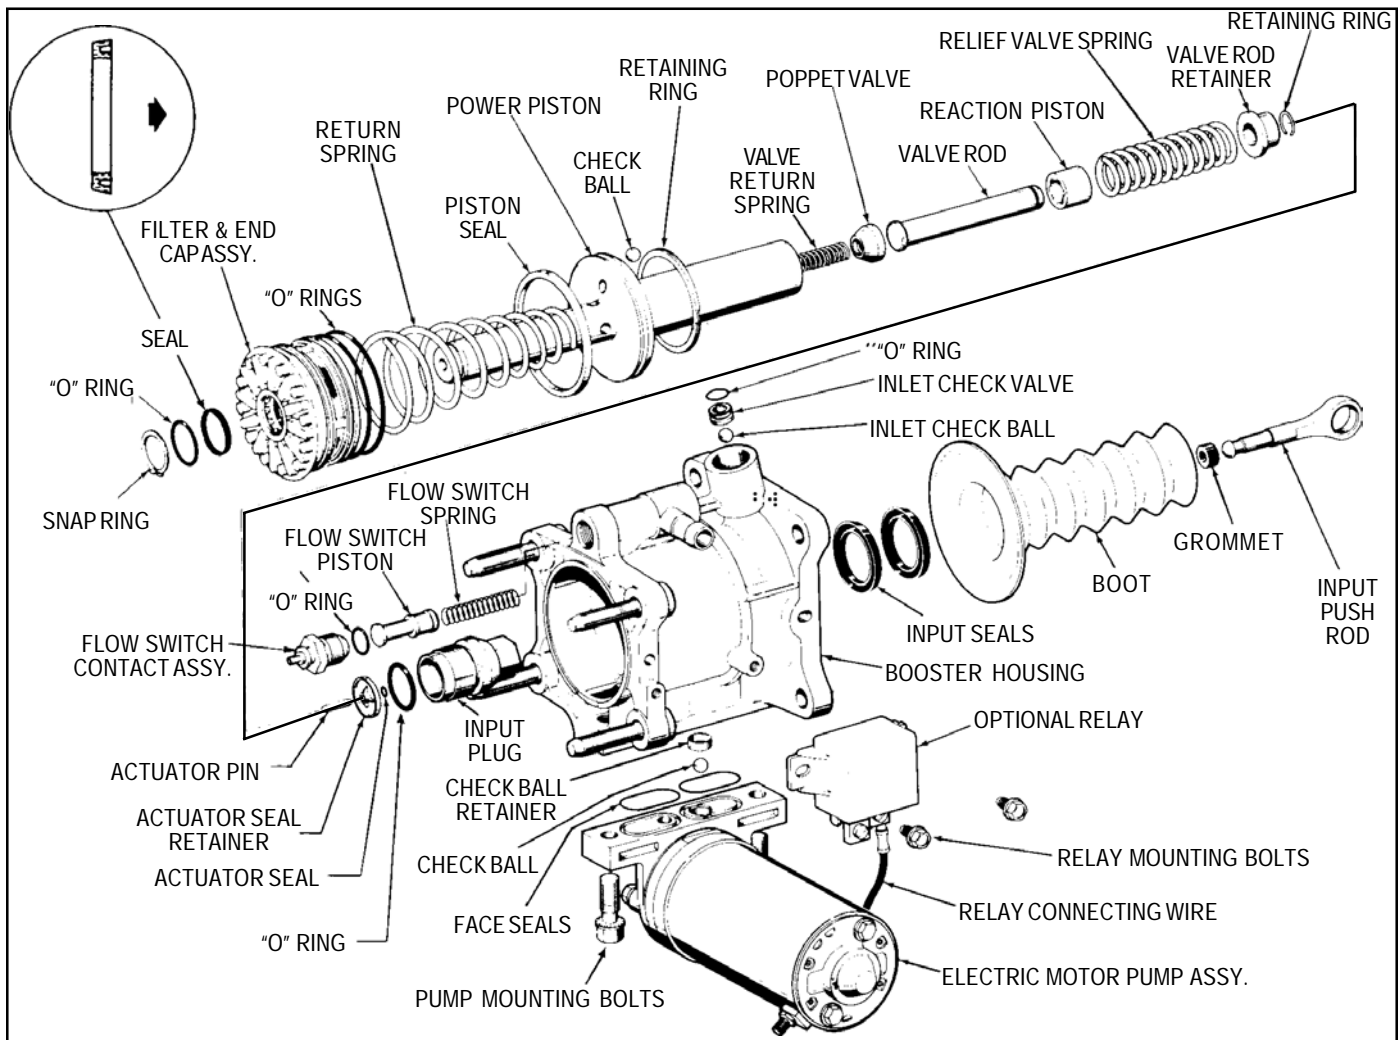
EXPLODED VIEW HYDRO-MAX BOOSTER
